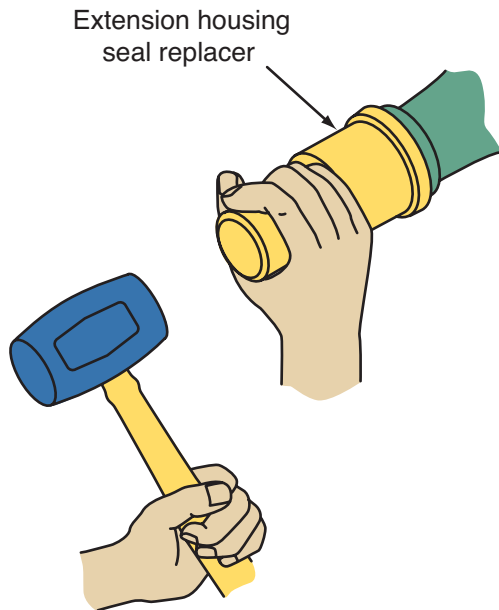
Drive the new seal in place with a hammer and seal driver.
